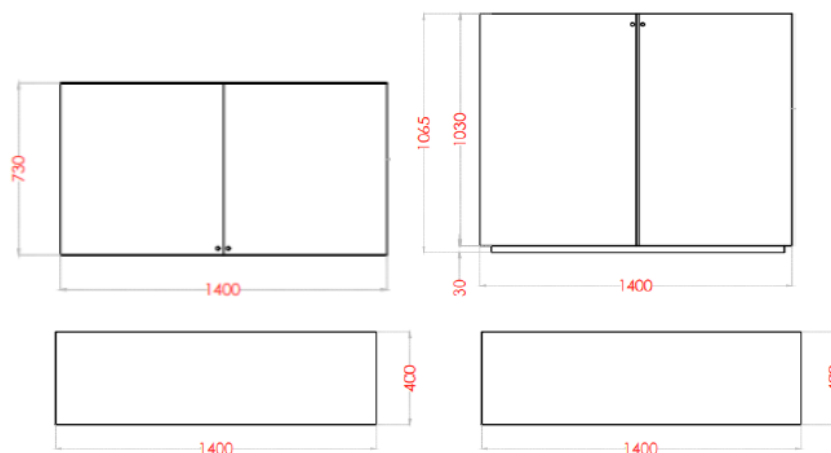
Dimensions of the lockable storage cabinets located inside the exhibit booth.
